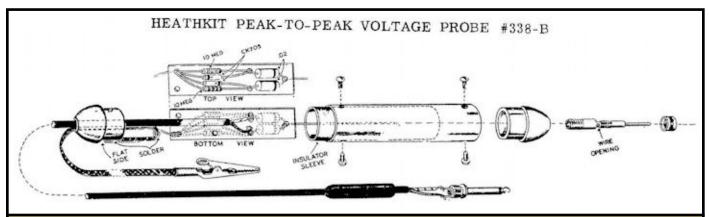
Assembly drawing of the #388-B probe using the later probe housing. Note phenolic board with brass rivets in holes for mounting components.
